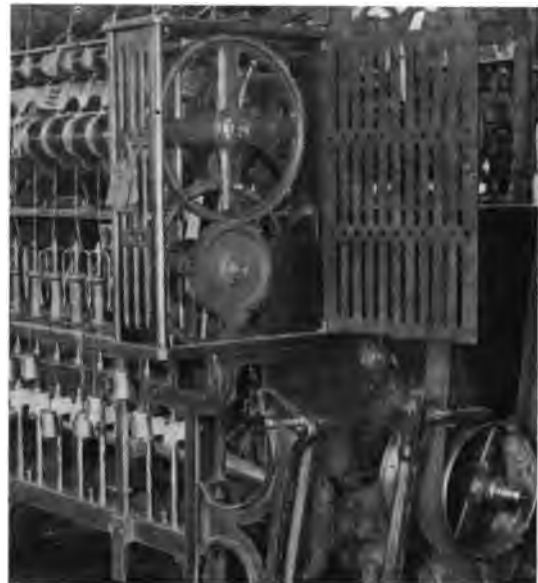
Gear Guard for Coarse-Spinning Frame.
